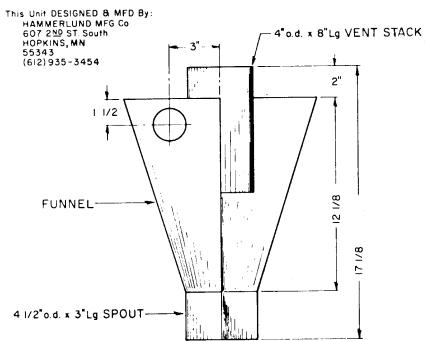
CYCLONE RECEIVER WELDMENT
